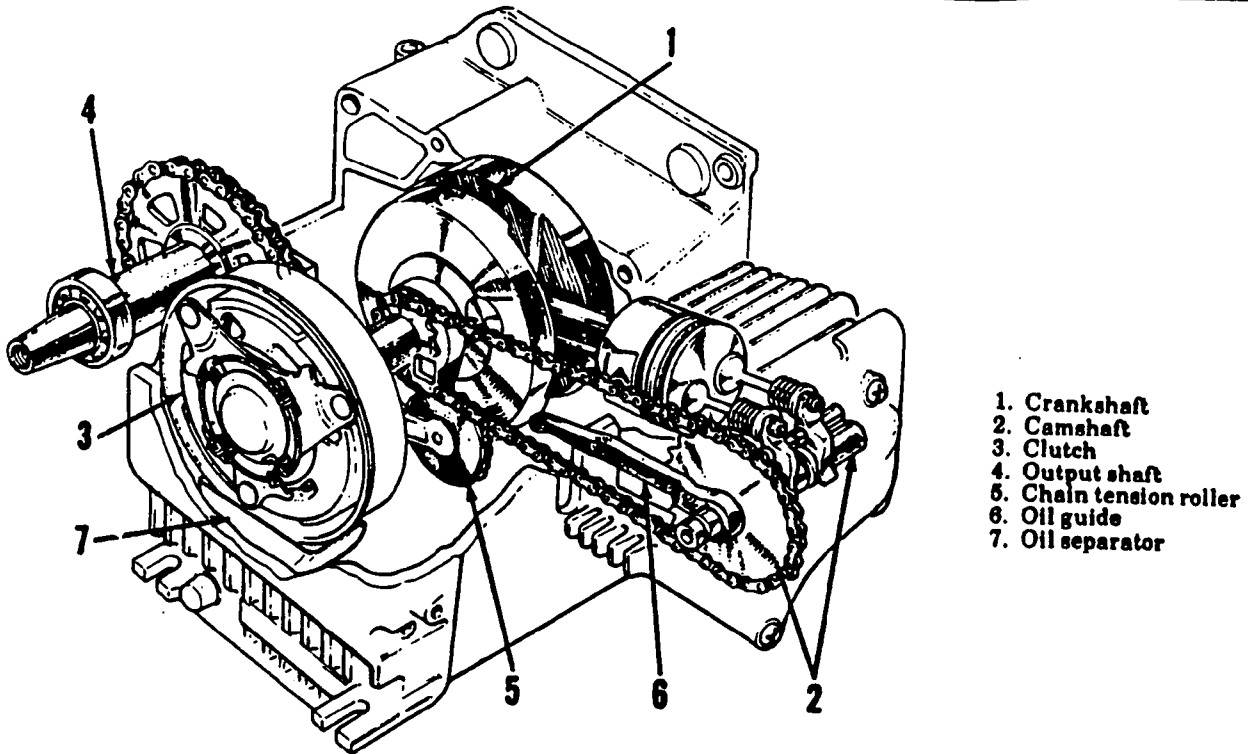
Mechanical layout of a typical overhead-valve, overhead-camshaft four-stroke engine.
